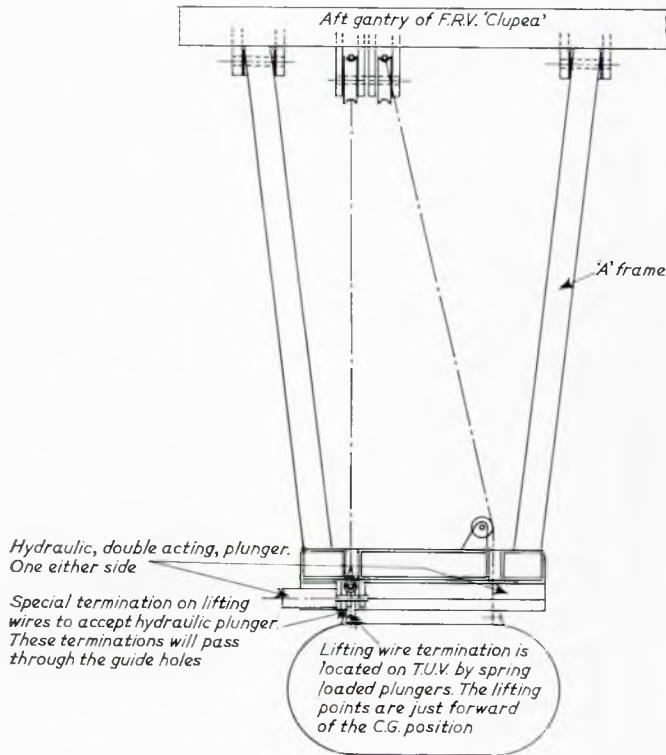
'A' frame (lifting wire system, locking method) for T.U.V.
